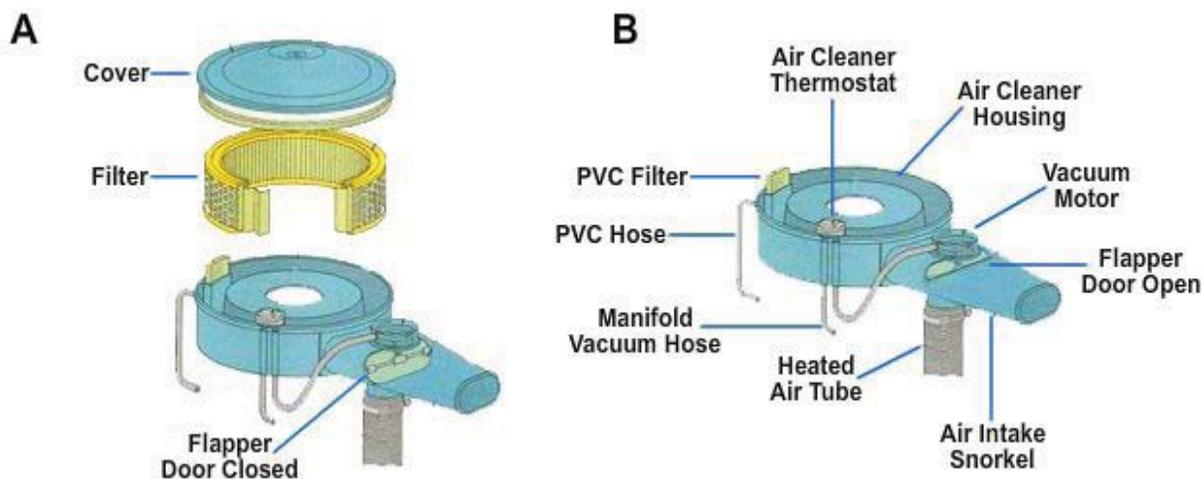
Checking the operation of a thermostatic air cleaner.
